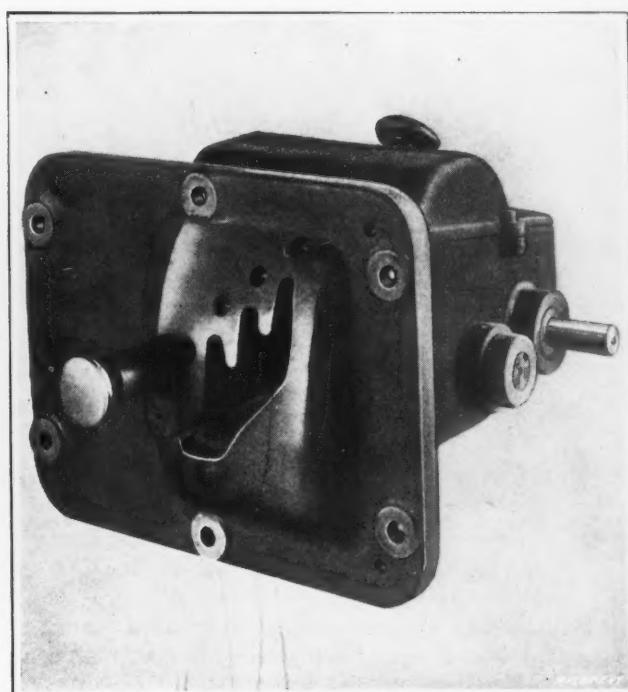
Change-gear Box, showing Cover permitting Splash-oiling
